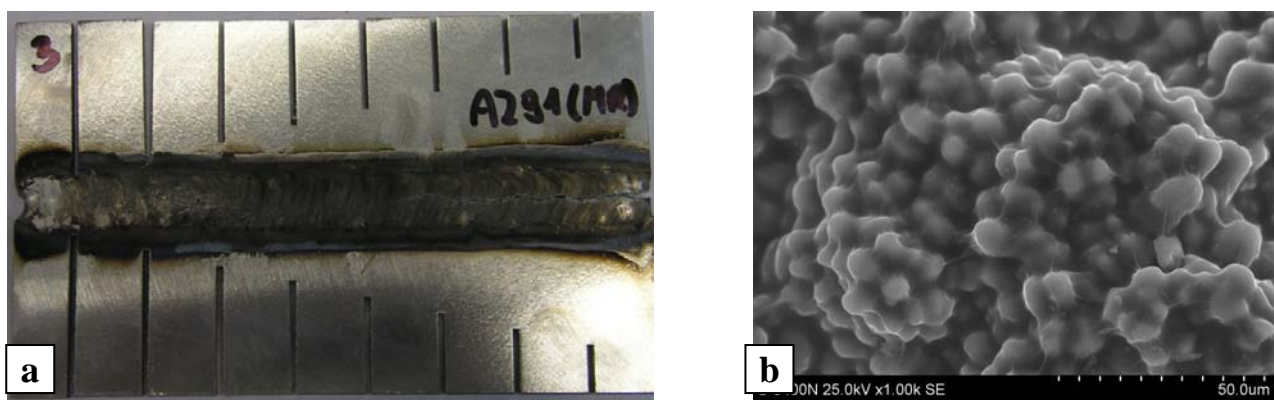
Plates after the welding test with filler (Houldcroft test): a) face of welded joint on the AZ91E alloy, b) crack surface in the AZ91E alloy, SE,
